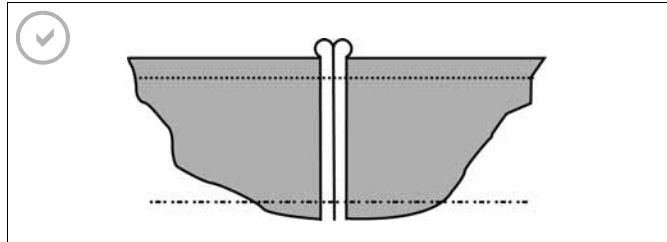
Butt-weld with welding beads that are too large but still acceptable.
